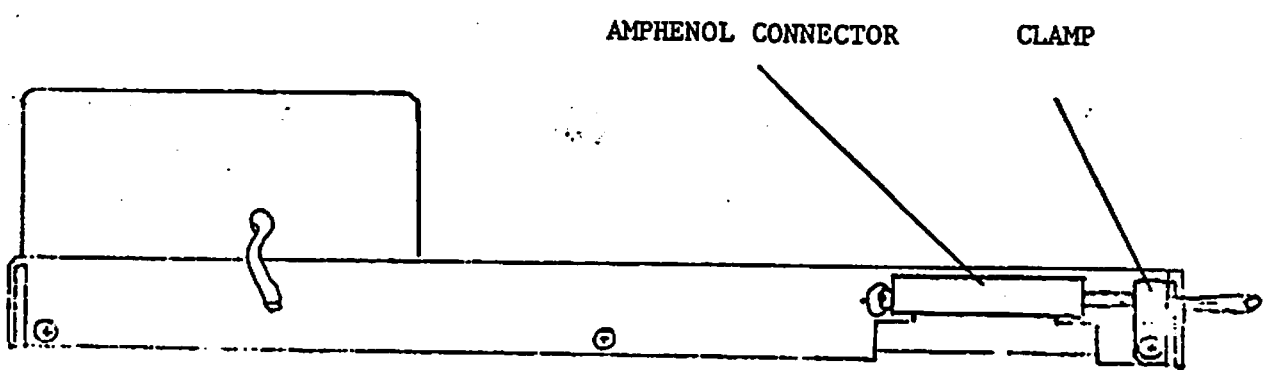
2231W I/O CABLE CLAMP LOCATION
